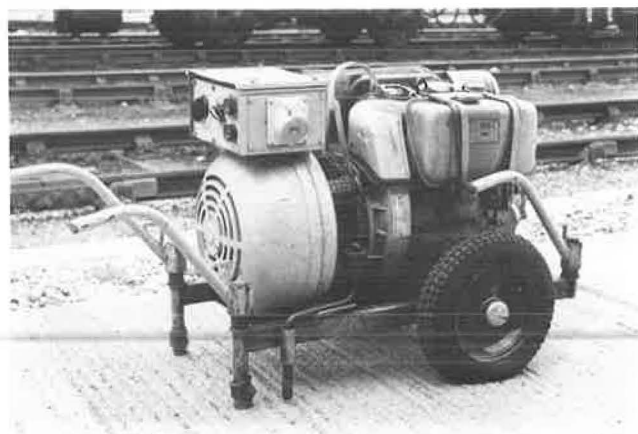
Hayter "Mighty Midget" 250a AC welding machine.
